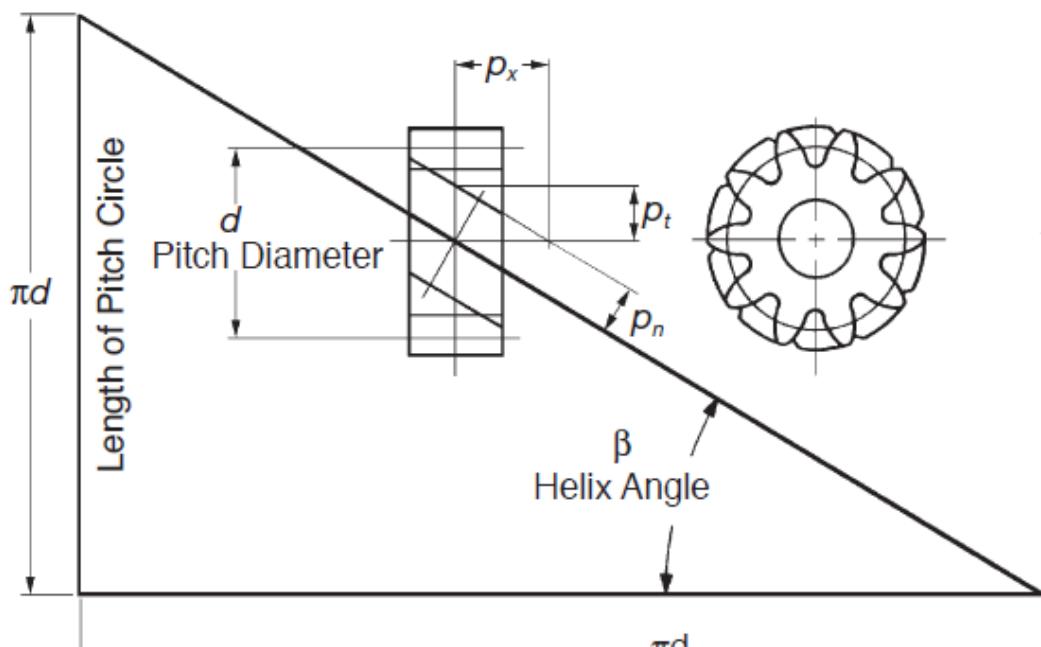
Fundamental Relationship of a Helical Gear (Right-Hand)
